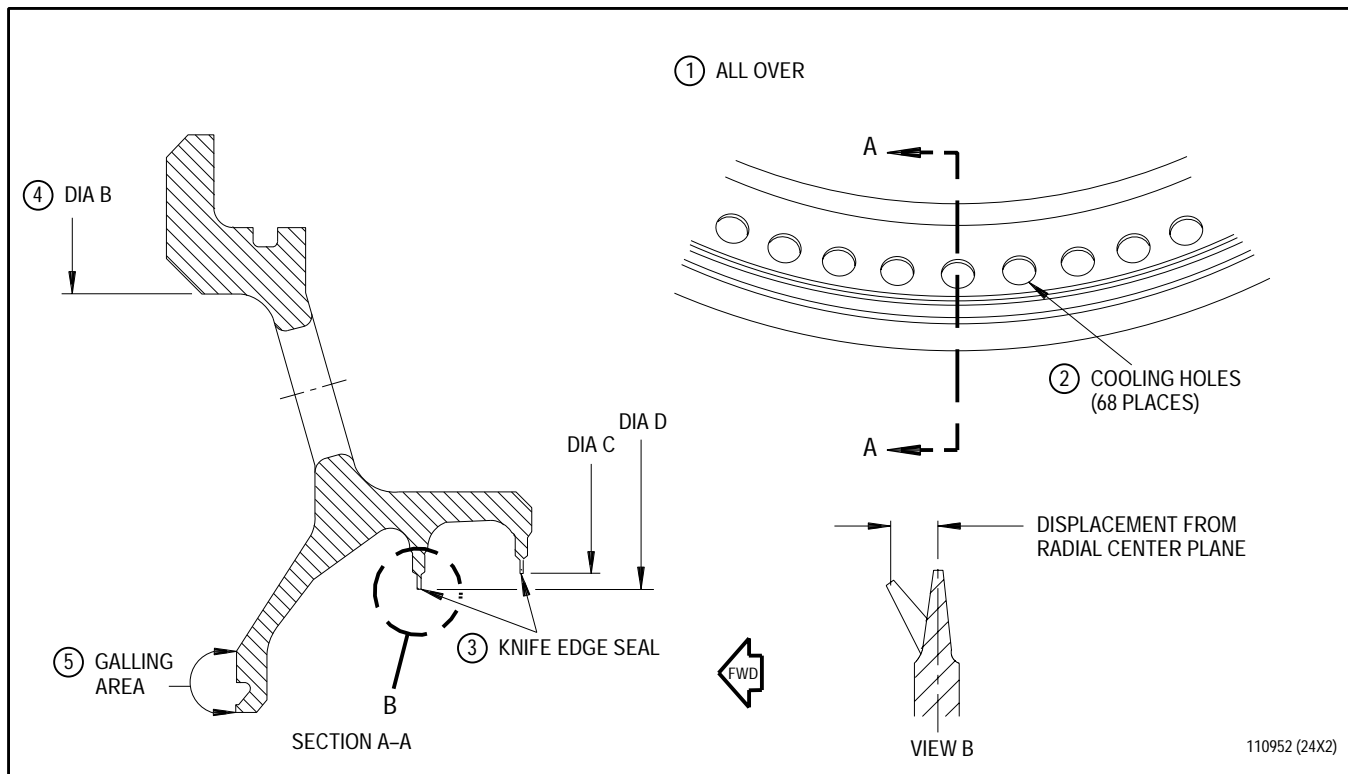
First Stage Turbine Blade Front Retaining Plate - Inspection
